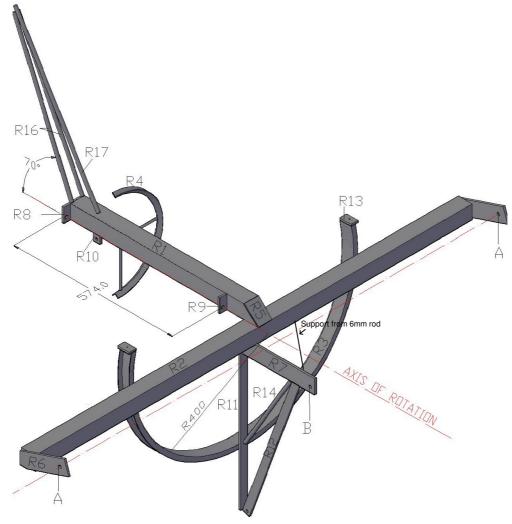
Rotating Support See also plans in 10.4 Plan, Fig.92-94
